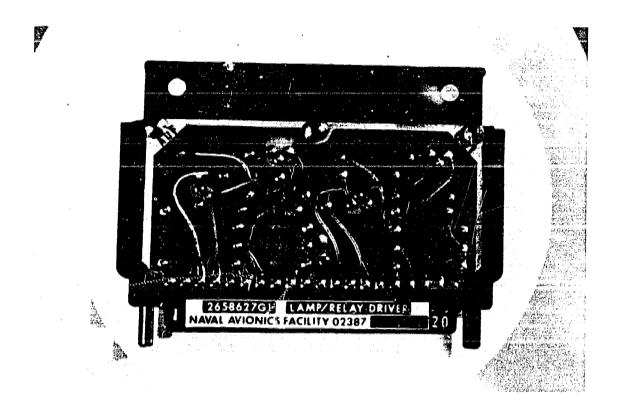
Basic Module with Picture Frame Construction A newer form of the basic module using internally-mounted components and a printed circuit board fastened to the cooling fin frame.
